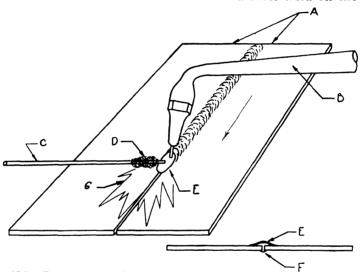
Brazing a steel joint (flat butt) 1/16": A. Base metal, B. Torch, C. Brass filler rod, D. Flux, E. Puddle & Bead, F. Penetration, G. The liquefied flux spreading on the steel surface ahead of the weld
